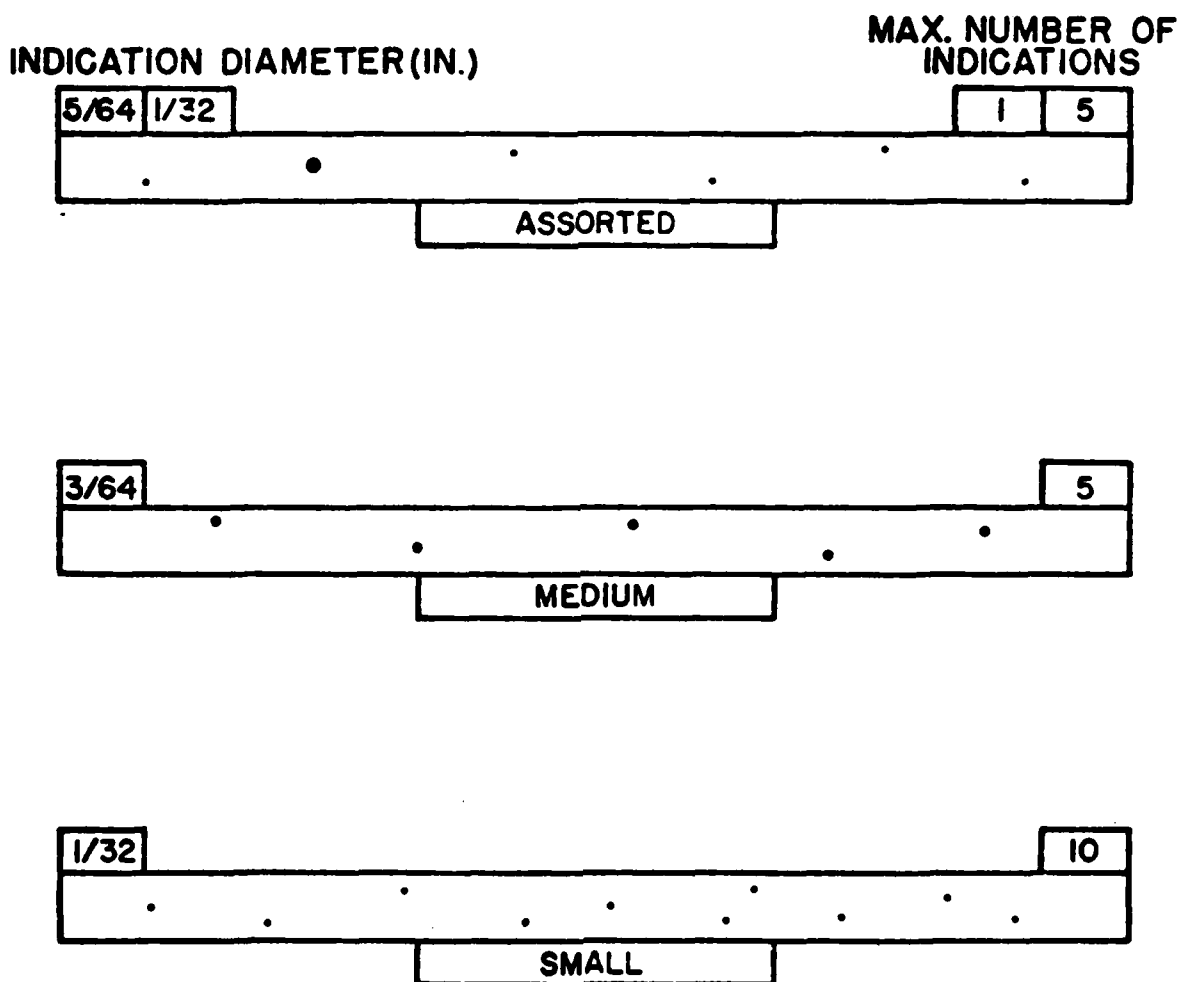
Class 1 Weld Surface Inspection Standard for Scattered Rounded or Non-Linear Indications (Sheet 2 of 6).
